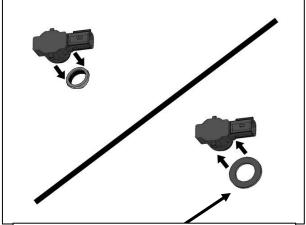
Push sensor and seal into mounting sleeve. Use 4mm Screws to hold sensor in place
